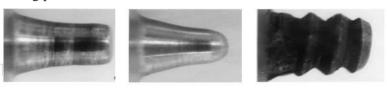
Tool Geometries (a) Cylindrical (b) Conical (c) Threaded
